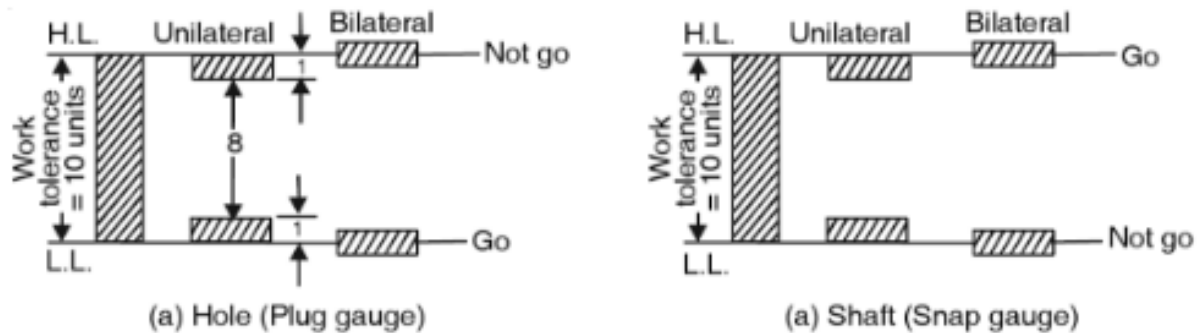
Allocation of Manufacturing Tolerance.
